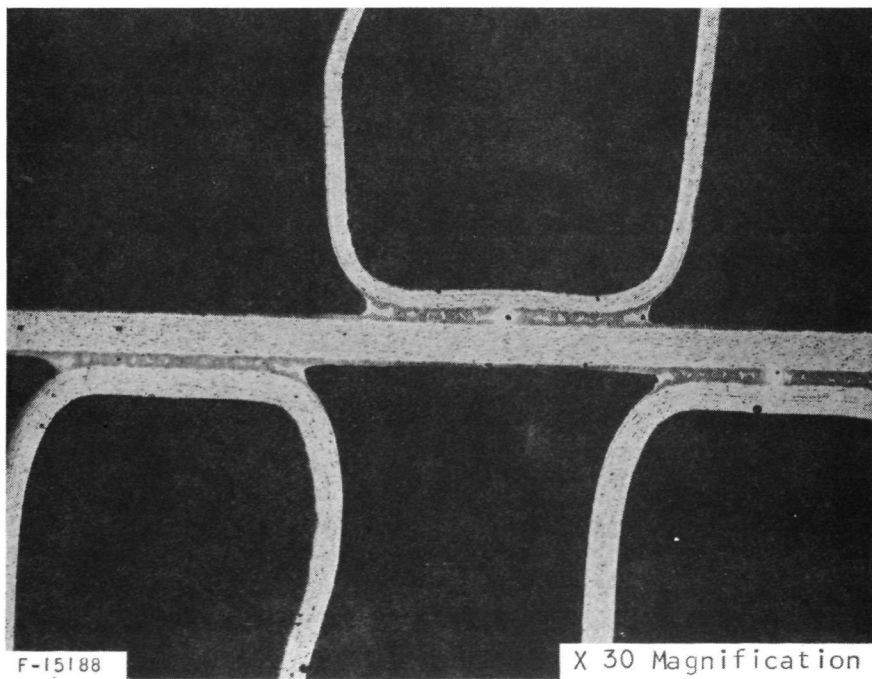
Sample Showing Braze Joint Configuration of 0.025 mm Thick Palniro I Braze
